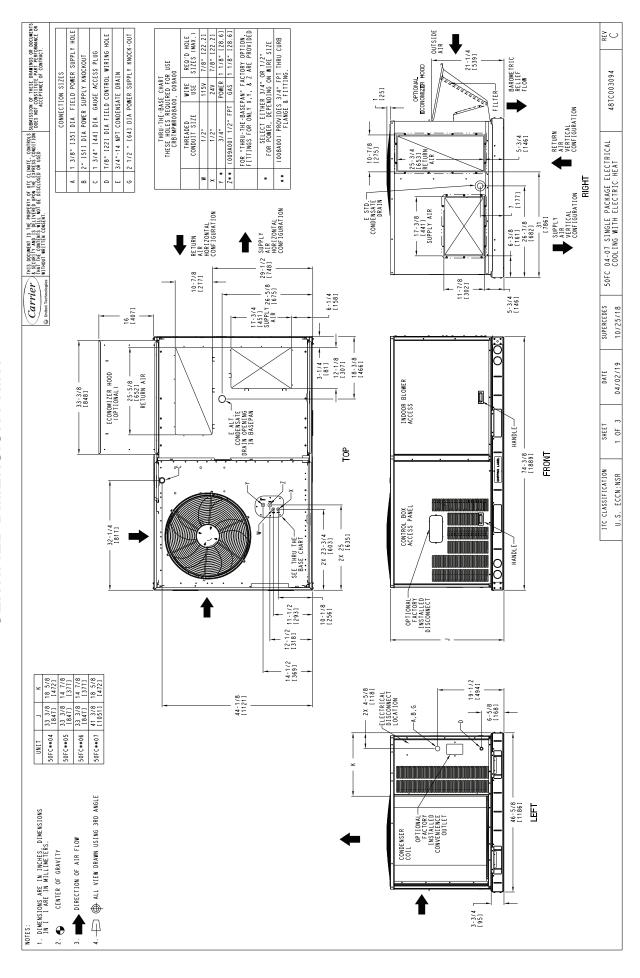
50FC\*\*04-07 Dimensional Drawing
